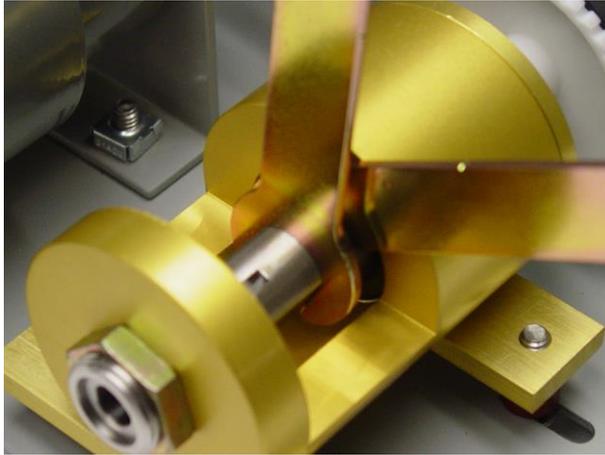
Case holder, interchangeable cutting head and spanner wrenches shown loosening tightening the cutting head.
